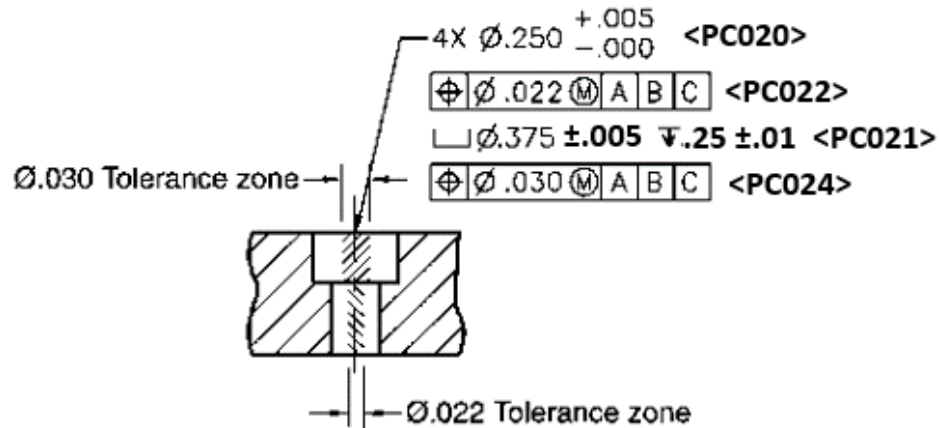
4X Counterbored Holes with Separate Position Tolerances
